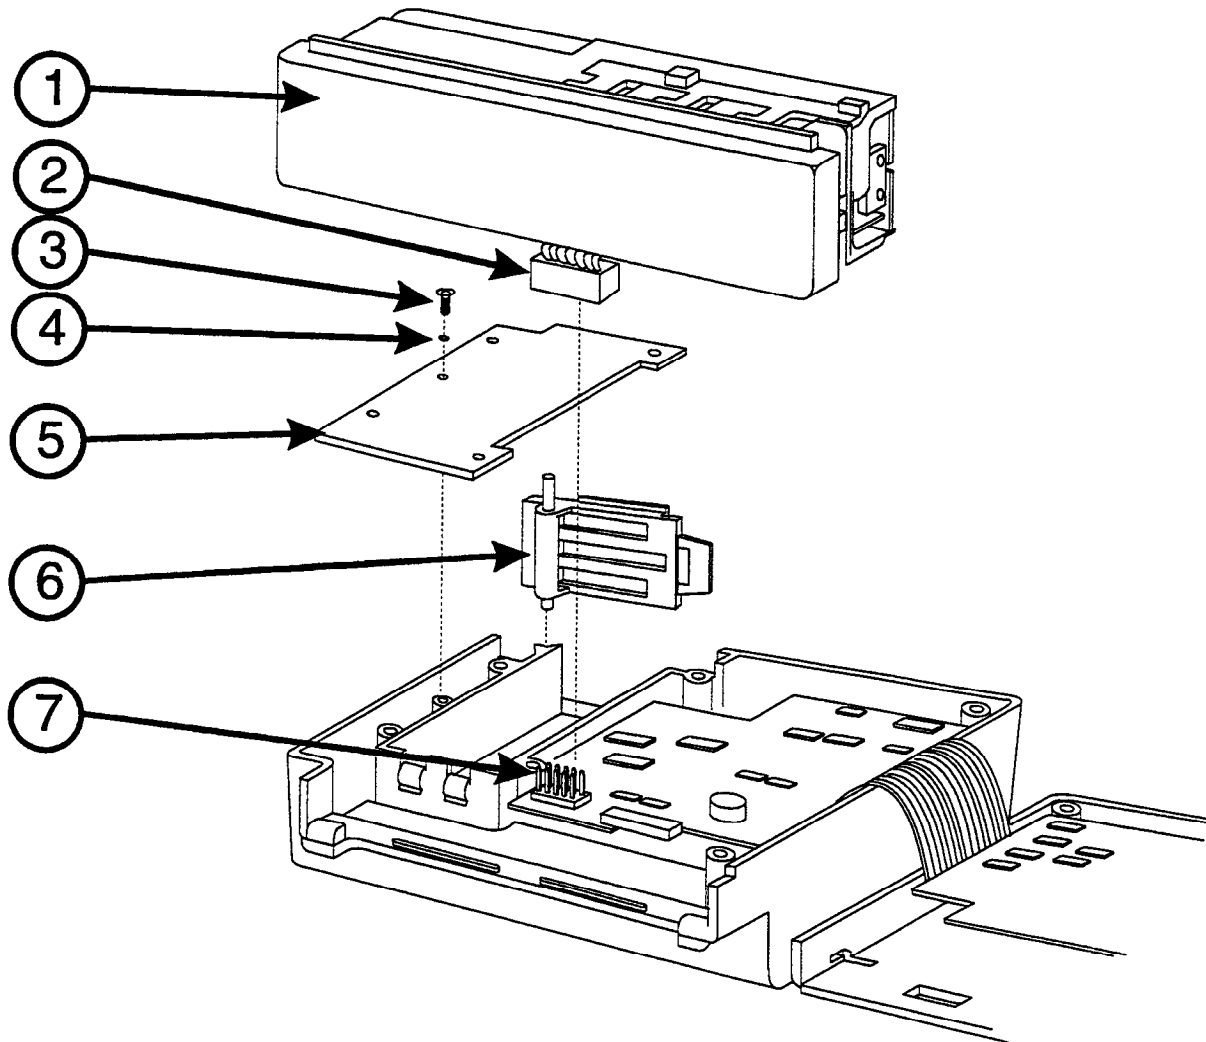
Mechanism Assembly and Battery Compartment Removal
